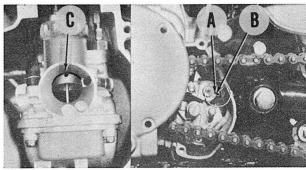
Remove carburetor cover and observe that index mark on throttle slide aligns with top of bore when marks on oil pump lever and pump body align. Turn cable adjusters to rect.
